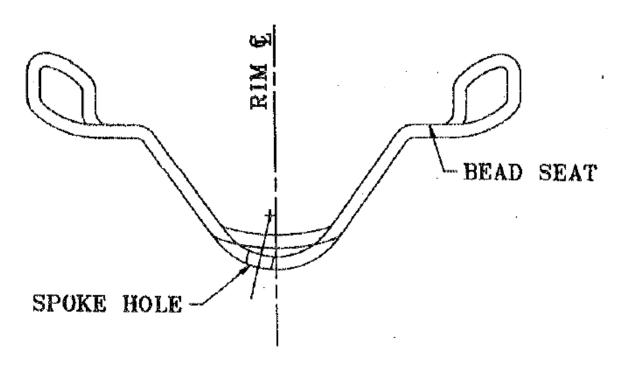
CYLINDRICAL BEAD SEAT RIM FOR MOTOR CYCLES
